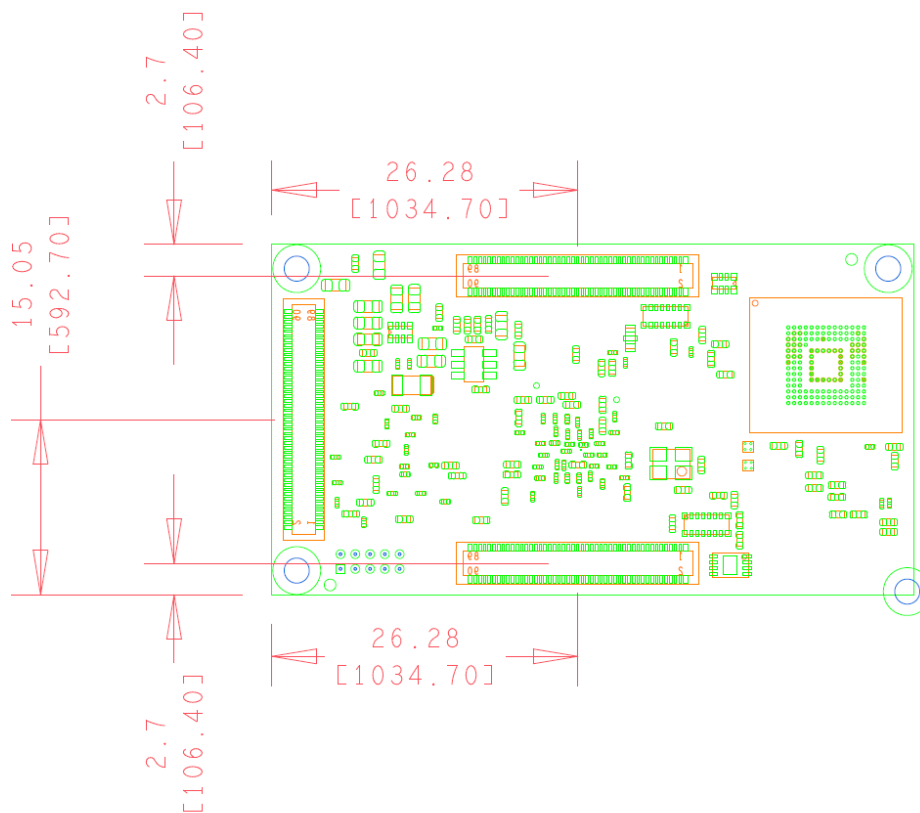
DART-MX93 Print Side Mechanics (Top view)
